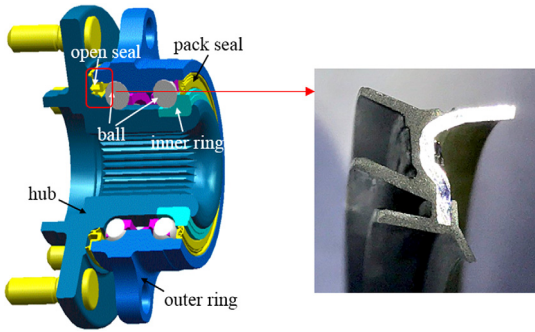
Configuration of automotive wheel bearing and geometry of seal
